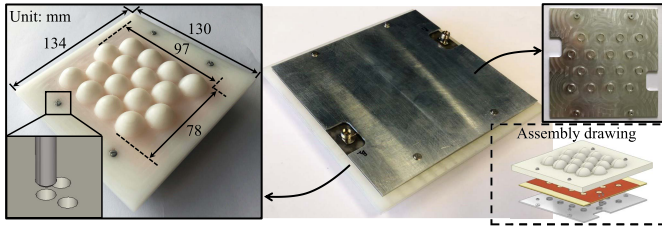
Photographs of the assembled antenna prototype. The milled HDPE elliptical lens array is shown on the left side, where the inset shows the screw holes used for the displacement of the lens layer. Right: perspective view of the antenna. The milled aluminum cavity and the assembly drawing are shown in the top and bottom insets, respectively.
